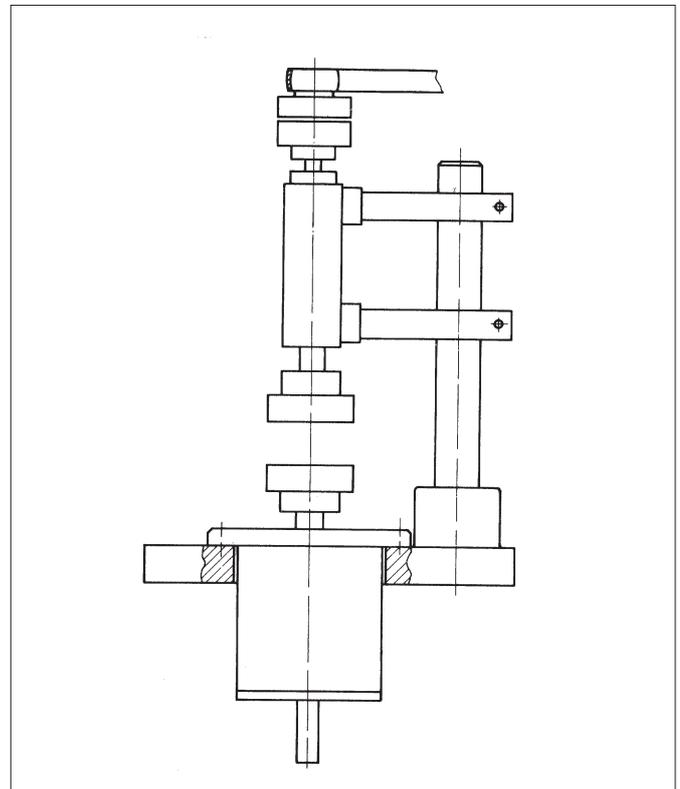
Pivot Welding with Stationary Spindle
